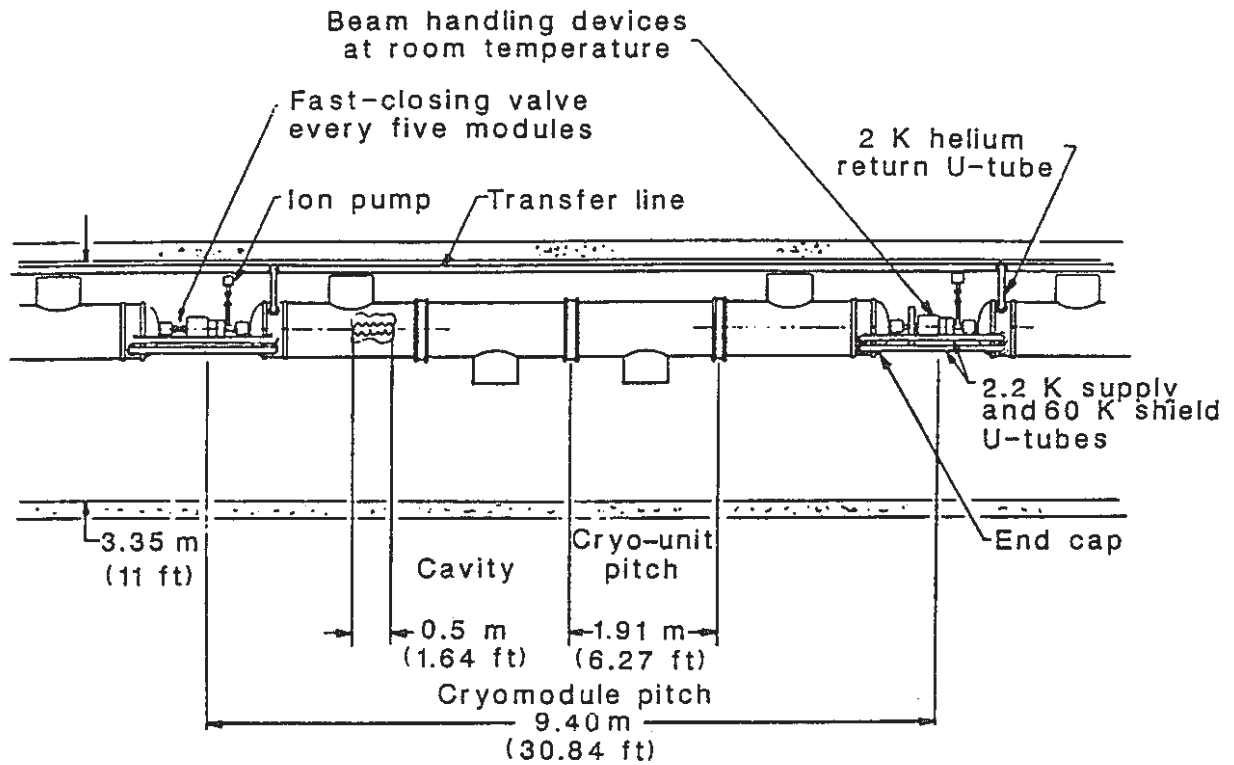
Schematic plan view of a cryomodule installed in the linac. (RF equipment not shown.)
